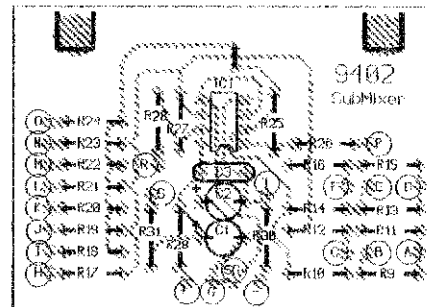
This drawing with phantom conductors may be useful if you must trace out the circuit.
